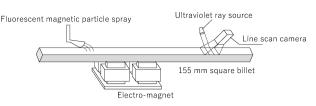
Overview of automatic magnetic particle inspection equipment
